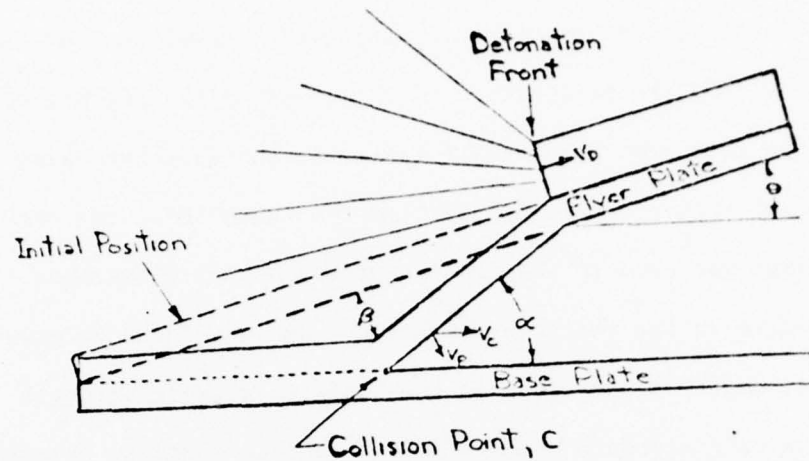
The Generalized Explosion Welding Configuration and Definition of Parameters. Parallel Geometry occurs when  $\theta = 0$ .
